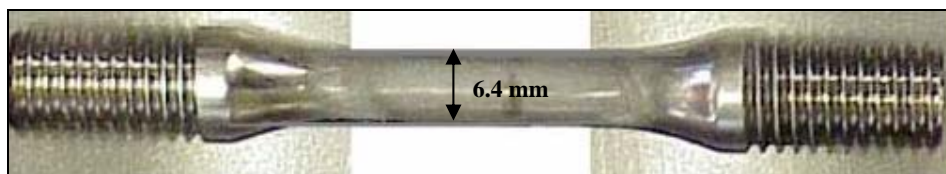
Mechanical test sample machined from the braze test plates. The 1.5 mm wide braze joint is located in the centre of the gauge length.
